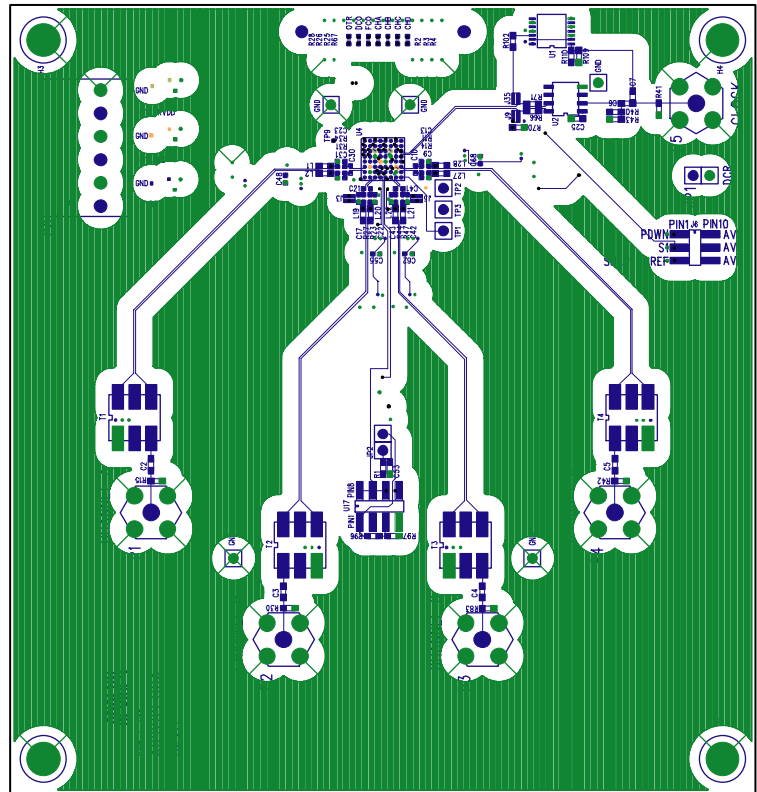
Evaluation Board Layout, Primary Side (With Ground Copper Pour)
